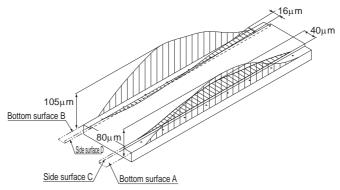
Surface Accuracy of the LM Guide Mounting Base (Milled Surface Only)
